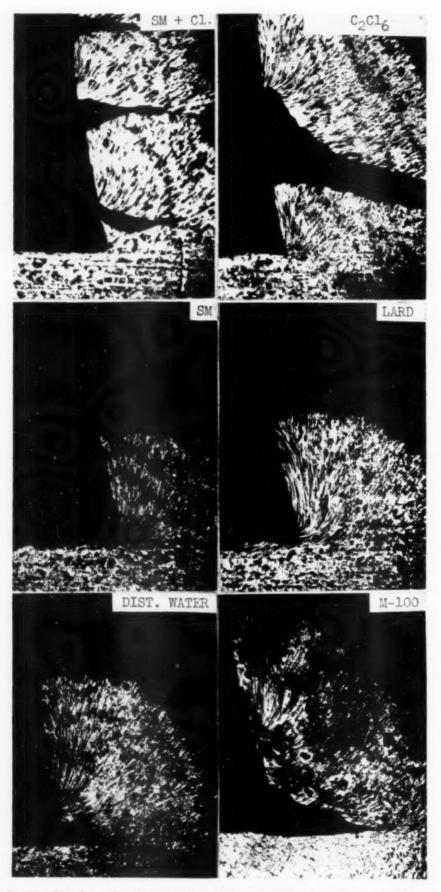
Chip formation (built-up edges 25x) produced in low-carbon steel with the different cutting fluids indicated. The end-cutting shaper tool had a 15° rake. Depth of cut was 0.020 in., making 9 strokes per minute each $6^{1/2}$ in. long.
